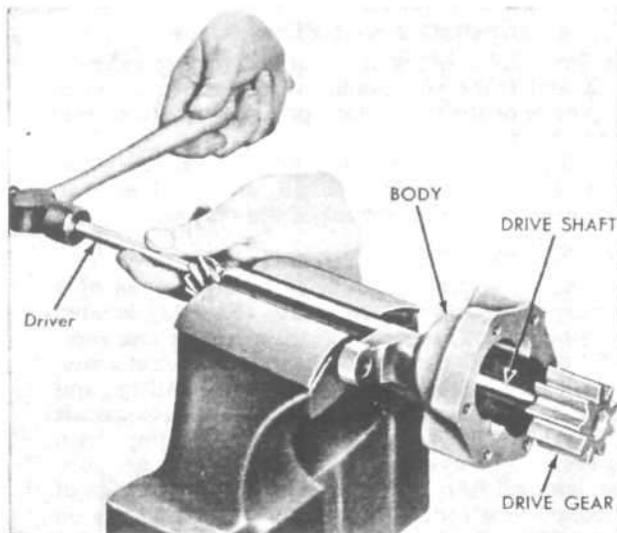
REMOVING OIL PUMP DRIVE SHAFT AND GEAR
